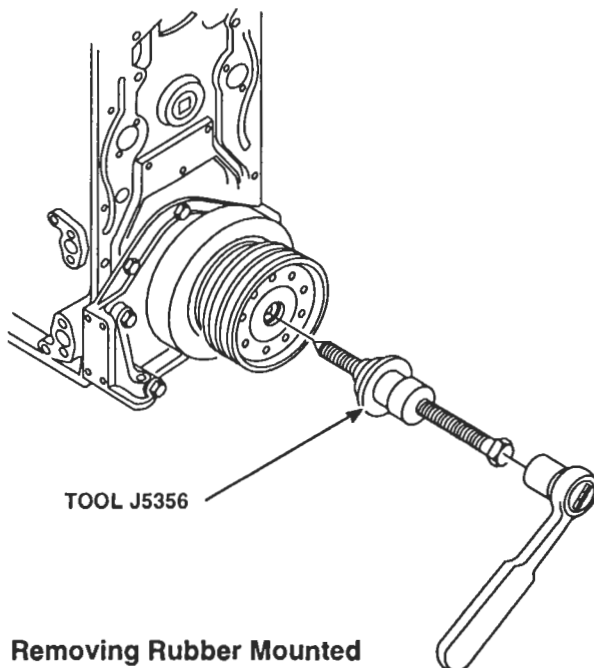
Removing Rubber Mounted Pulley from Crankshaft
